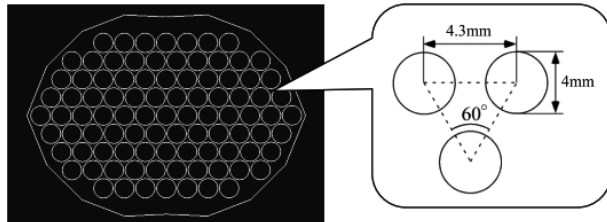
Schematic of a perforated metal sheet filter with circular holes. Holes are arranged periodically.
